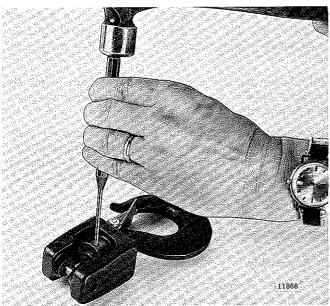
Removing Roll Pin Securing Hook Nut to Hook Shank
